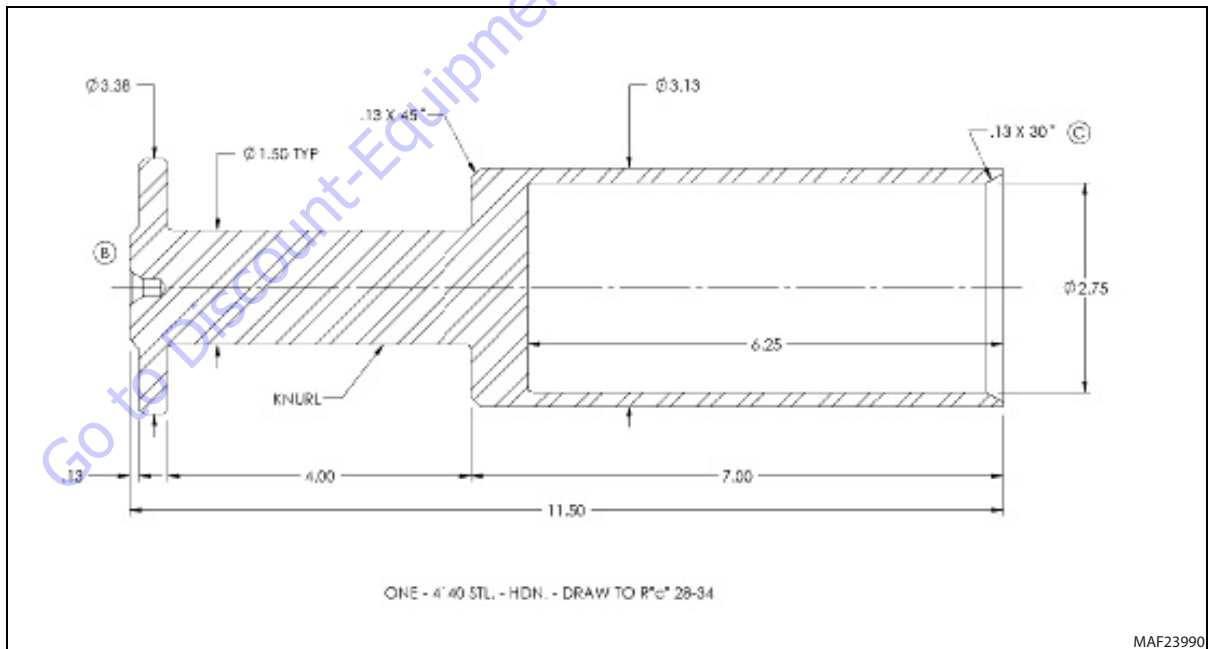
Bearing Cone Pressing Tool (T145741)
